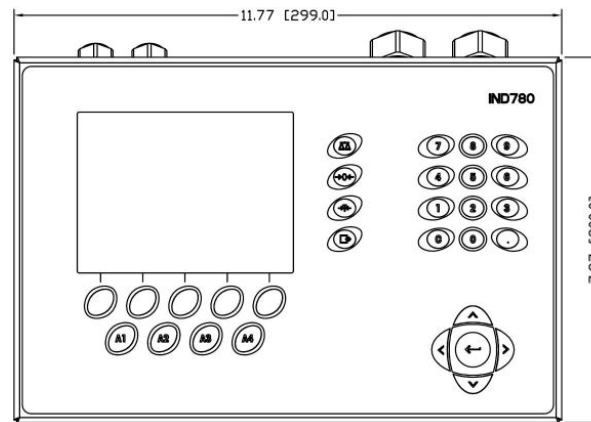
IND780 Harsh Enclosure Terminal Dimensions, Front
